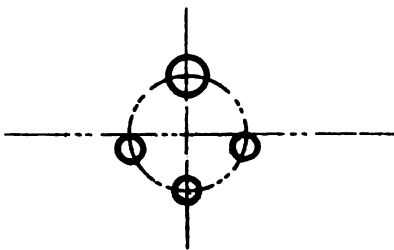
Template for drilling holes in base of tube socket. If you cut this out and paste it on the hard rubber there need be no fear of going wrong, as it is exactly right and will save measuring.
